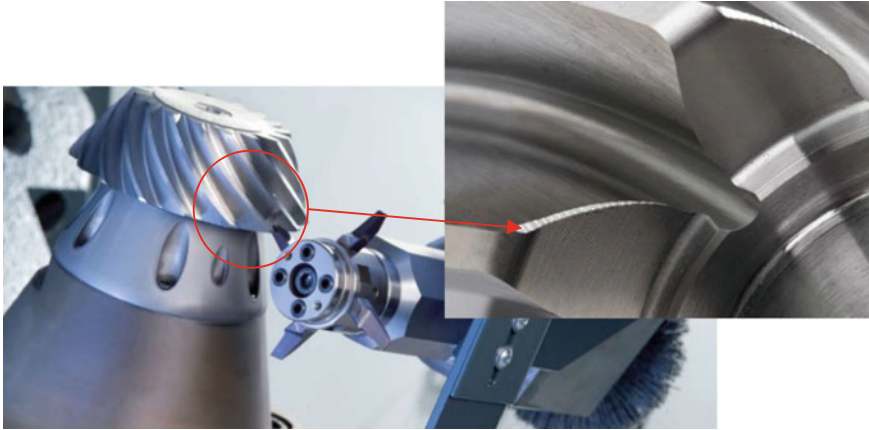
Klingelnberg Toe and Heel chamfering of a spiral bevel pinion
